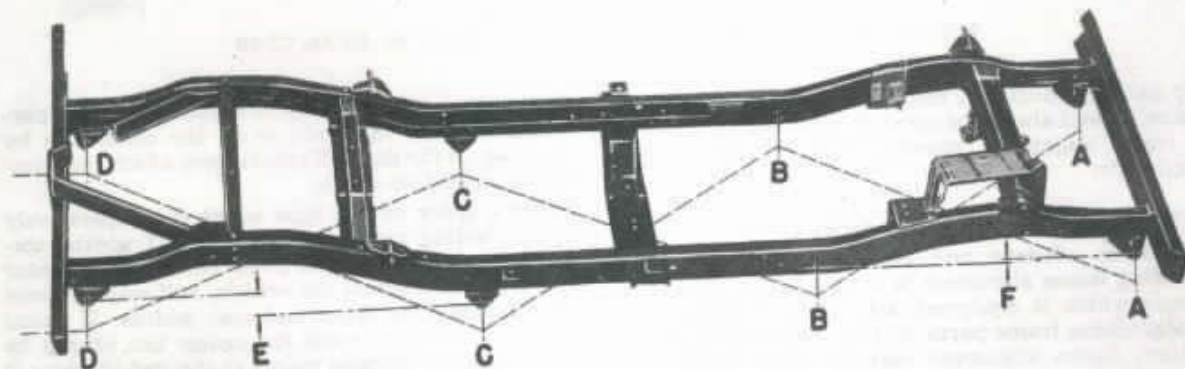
FRAME ASSEMBLY—MODEL CJ-5, CJ-5A, CJ-6, CJ-6A (MODEL CJ-5 SHOWN)
